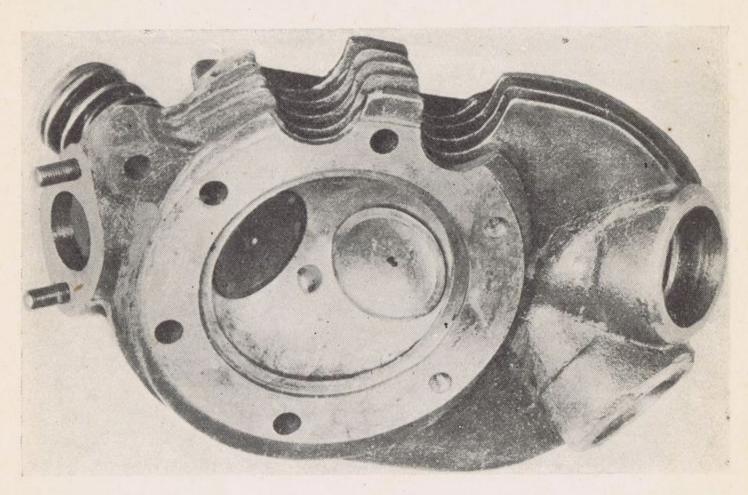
Underneath View of Two-port Cylinder Head showing Hemi-Spherical Combustion Chamber and Valves
